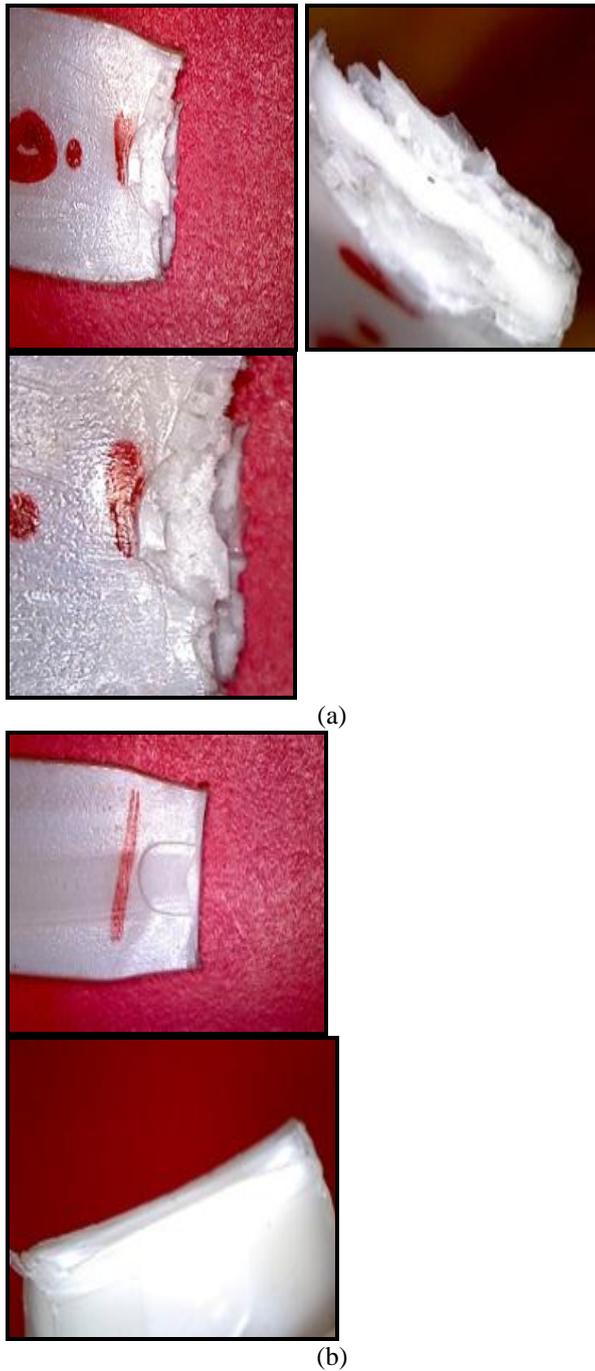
Fracture appearance of PC/TPU blend at:(a) -20° (b) 80°C
